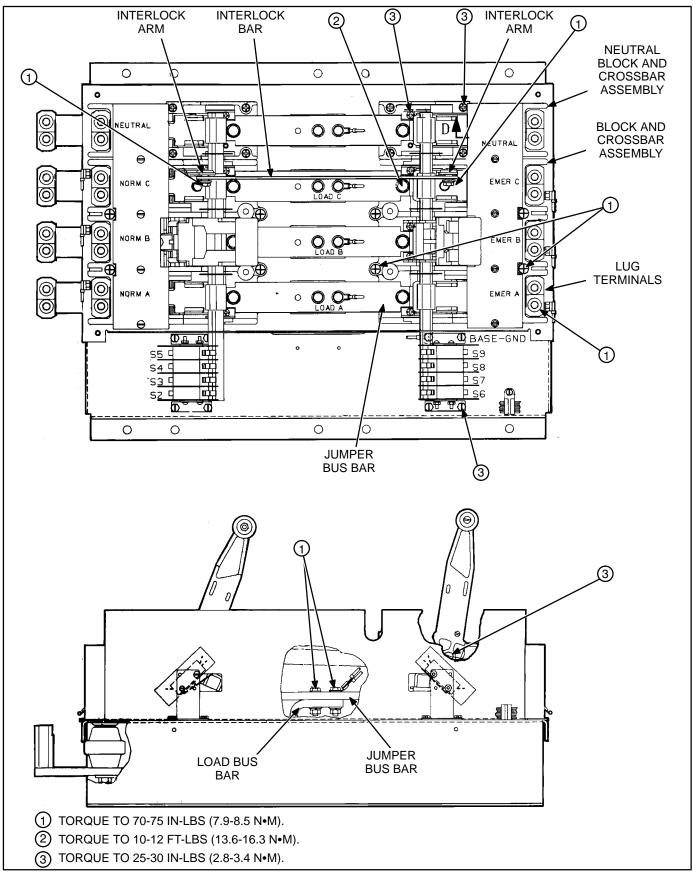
4-POLE SWITCH ASSEMBLY (300 TO 600 AMPERES)
